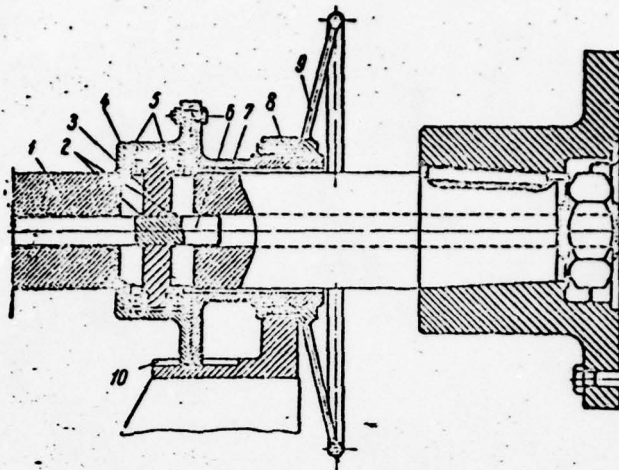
Simplified diagram of the mechanism of a manual connecting-rod drive.
